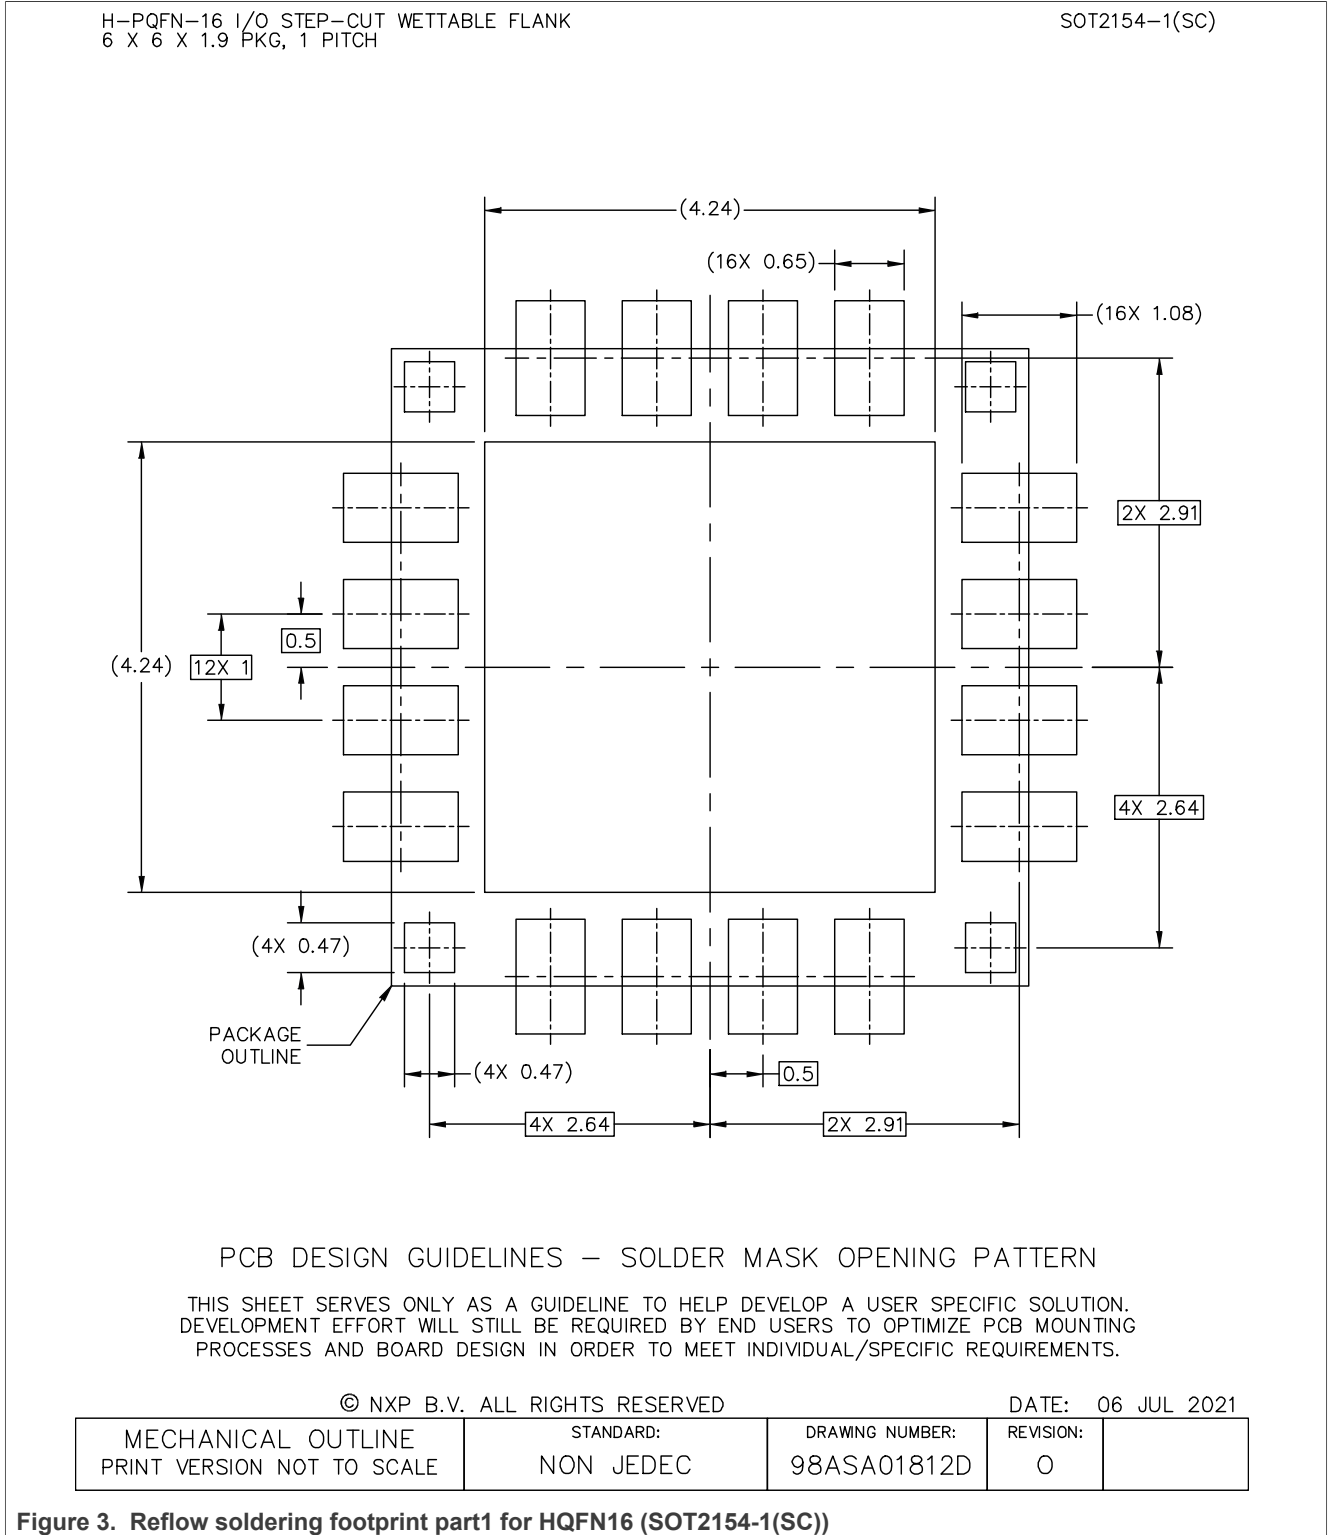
Reflow soldering footprint part1 for HQFN16 (SOT2154-1(SC))
